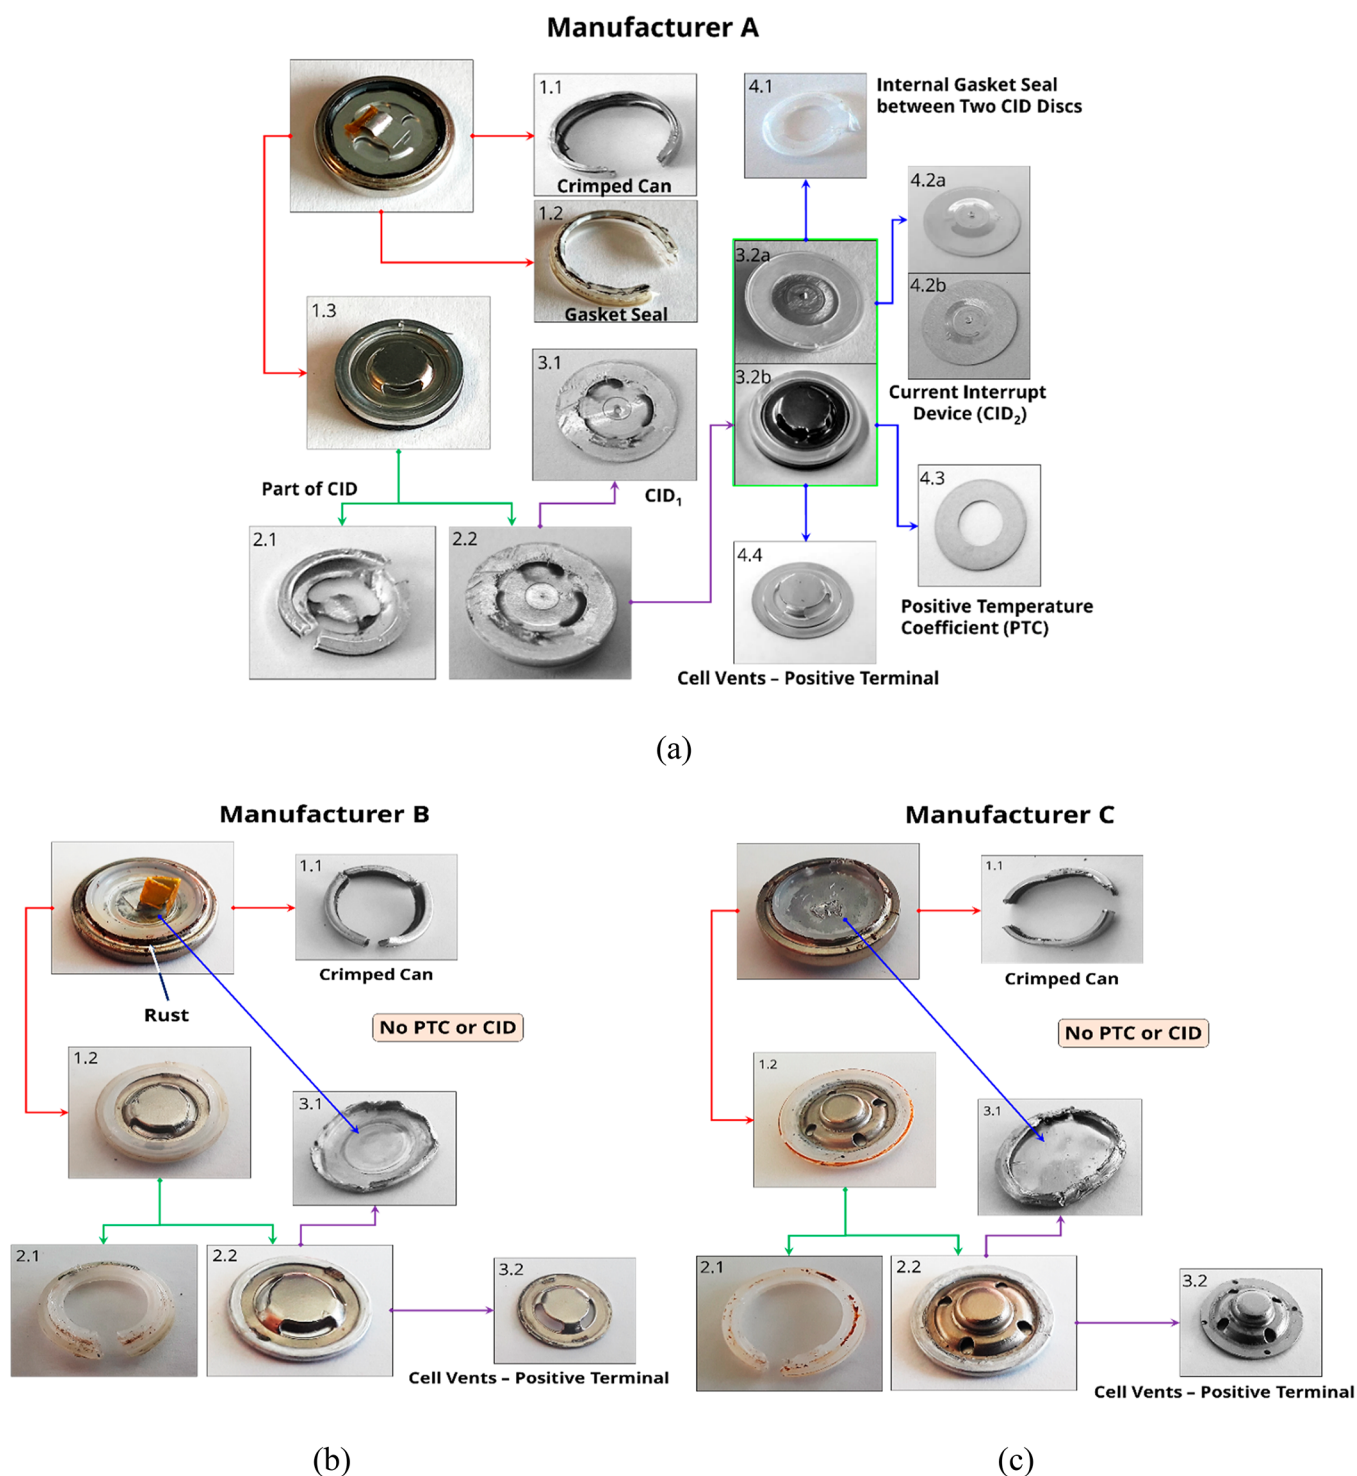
Destructive physical analysis of test samples. Photographs of the header parts of cells from (a) manufacturer A (original cell manufacturer), (b) manufacturer B (counterfeit), and (c) manufacturer C (low quality).
